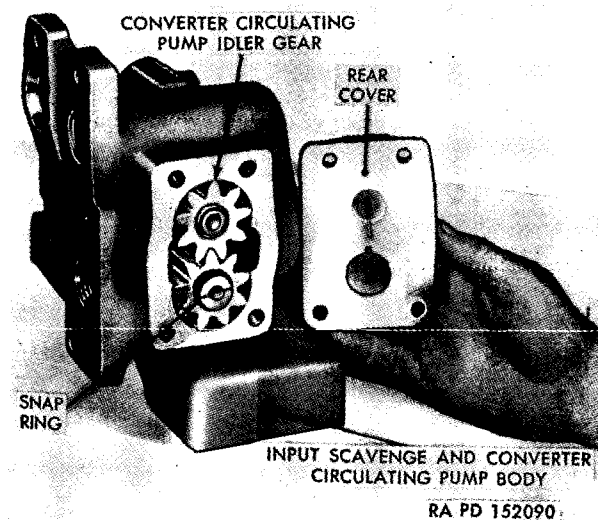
Removing or installing rear cover of input scavenge and converter circulating pump.
